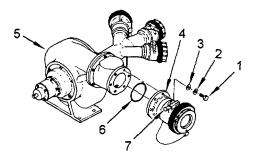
Flange Mounted Unisex Coupling O-Ring Replacement
